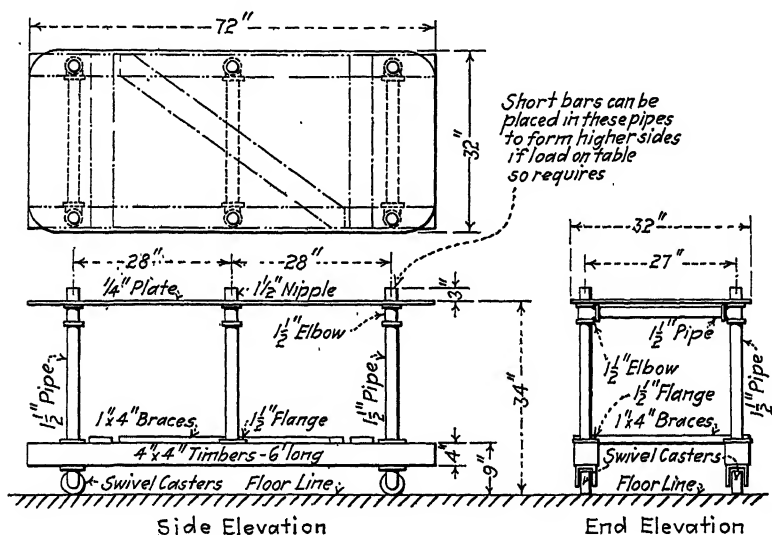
MOVABLE TABLE FOR DRILL STEELS.
